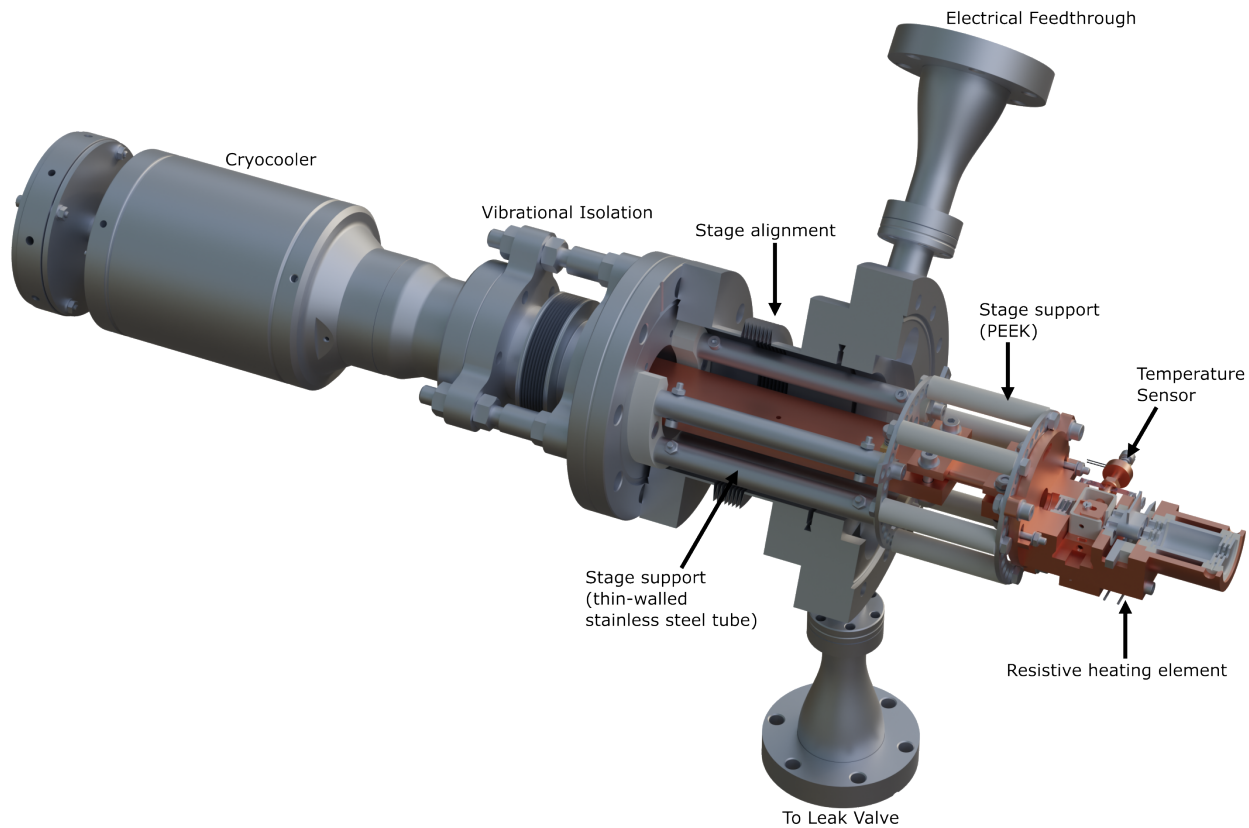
Deposition stage, support, and cryocooler shown in half-section view of mounting flange. Key components are labelled.
